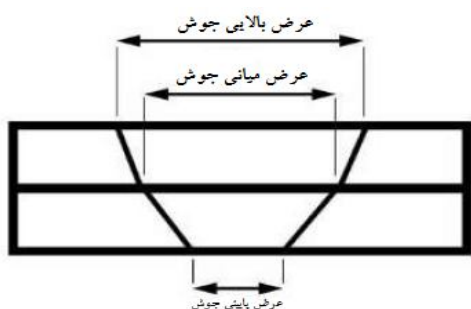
Schematic diagram of the cross section of a spot weld
